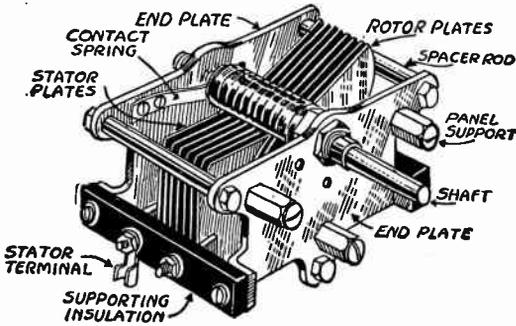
The Parts Considered in Design of a Typical Variable Condenser.
